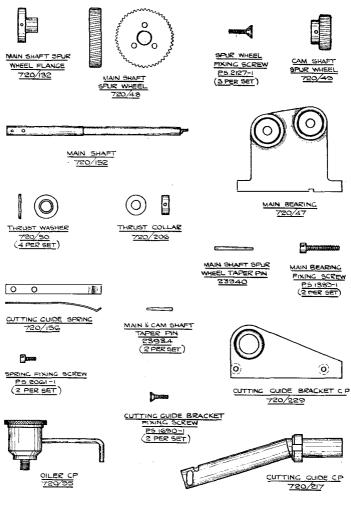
MAIN SHAFT, SPUR WHEEL AND CUTTING GUIDE PARTS.
